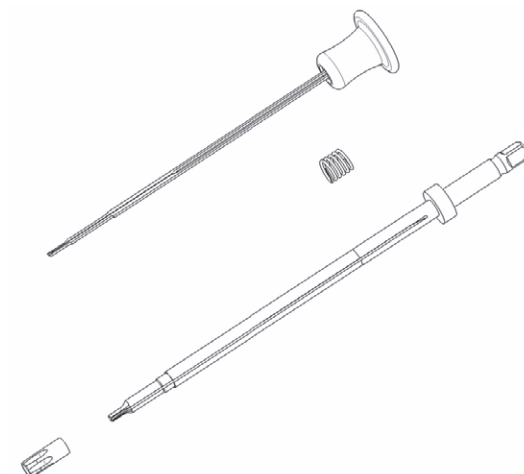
Exploded view of S⁴ Cervical self holding polyaxial screwdriver
